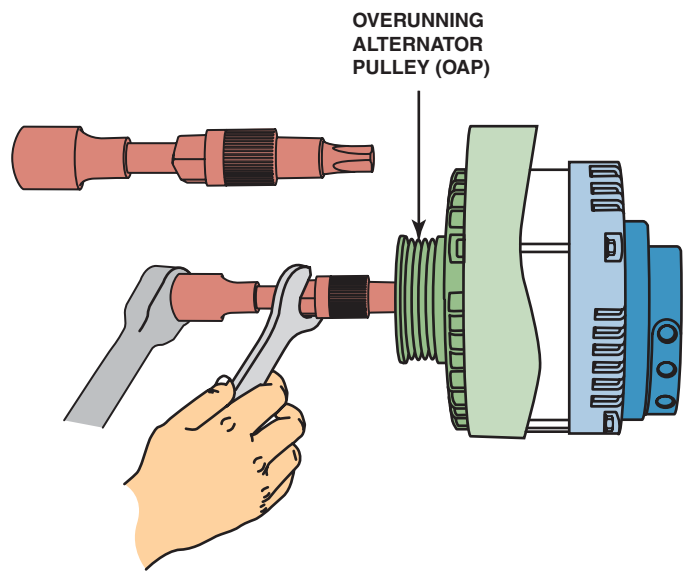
A special tool is needed to remove and install overrunning alternator pulleys or dampeners.
